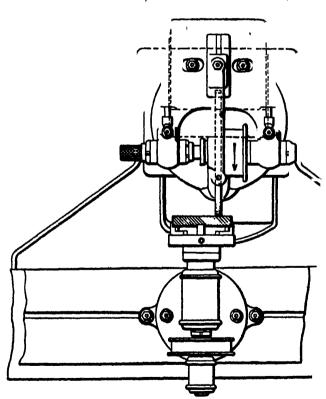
FINISHING THE FACE OF A PIECE ON A UNIVERSAL MACHINE
